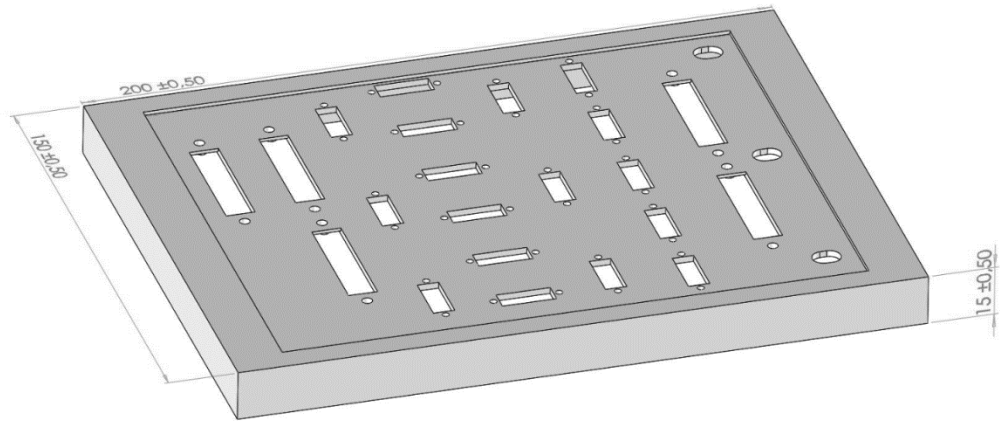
Miniature Semiconductor Breakout Box Lid 3D model initially used for printing. Indent on top of the lid was removed due to the printing process initially failing. Four 4 mm holes for lid mounting were drilled in the corners of the lid. One 4 mm hole was drilled in the lid for an indicator led.
